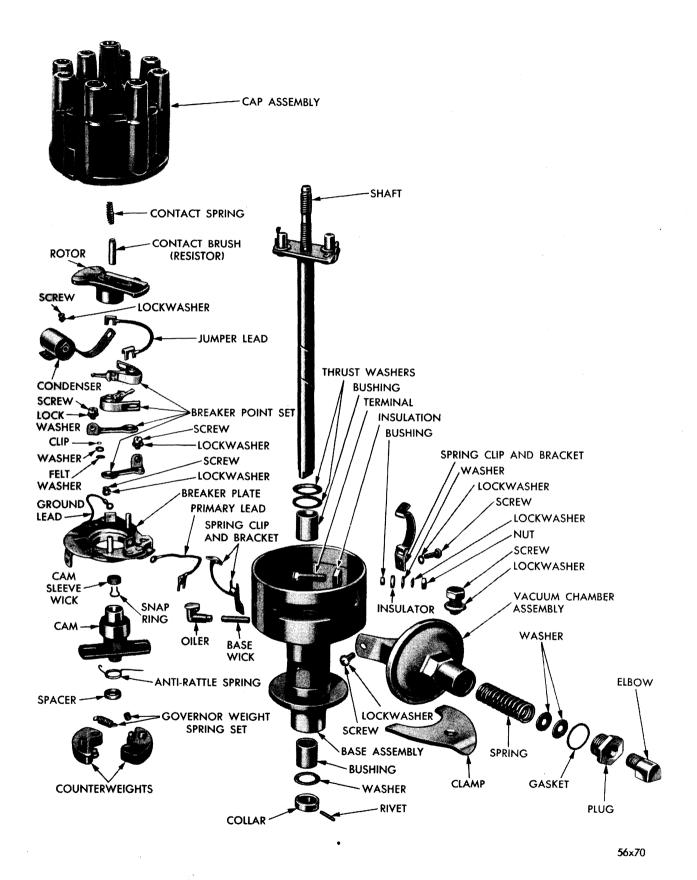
Dual Point Distributor C-70, C-72, C-73 (Disassembled)
